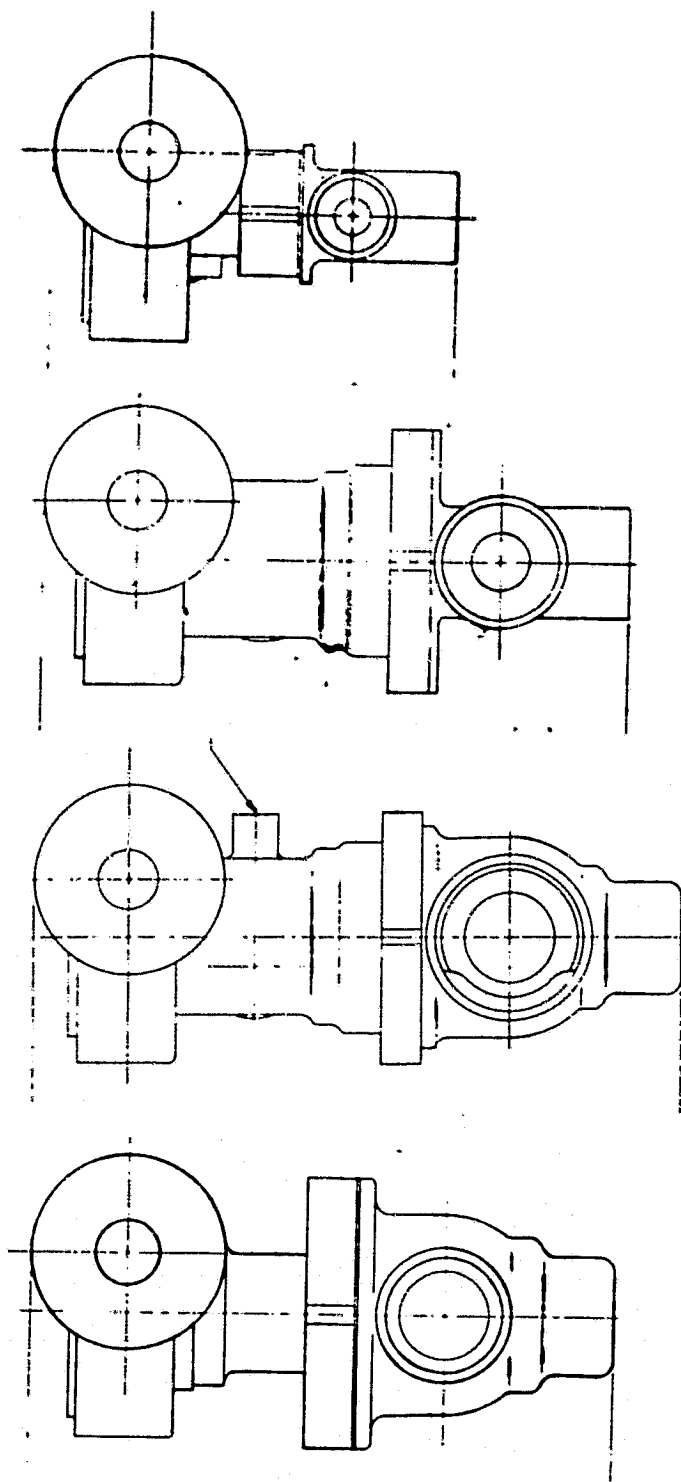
Primary Valves, Advanced Expander Cycle Engine
